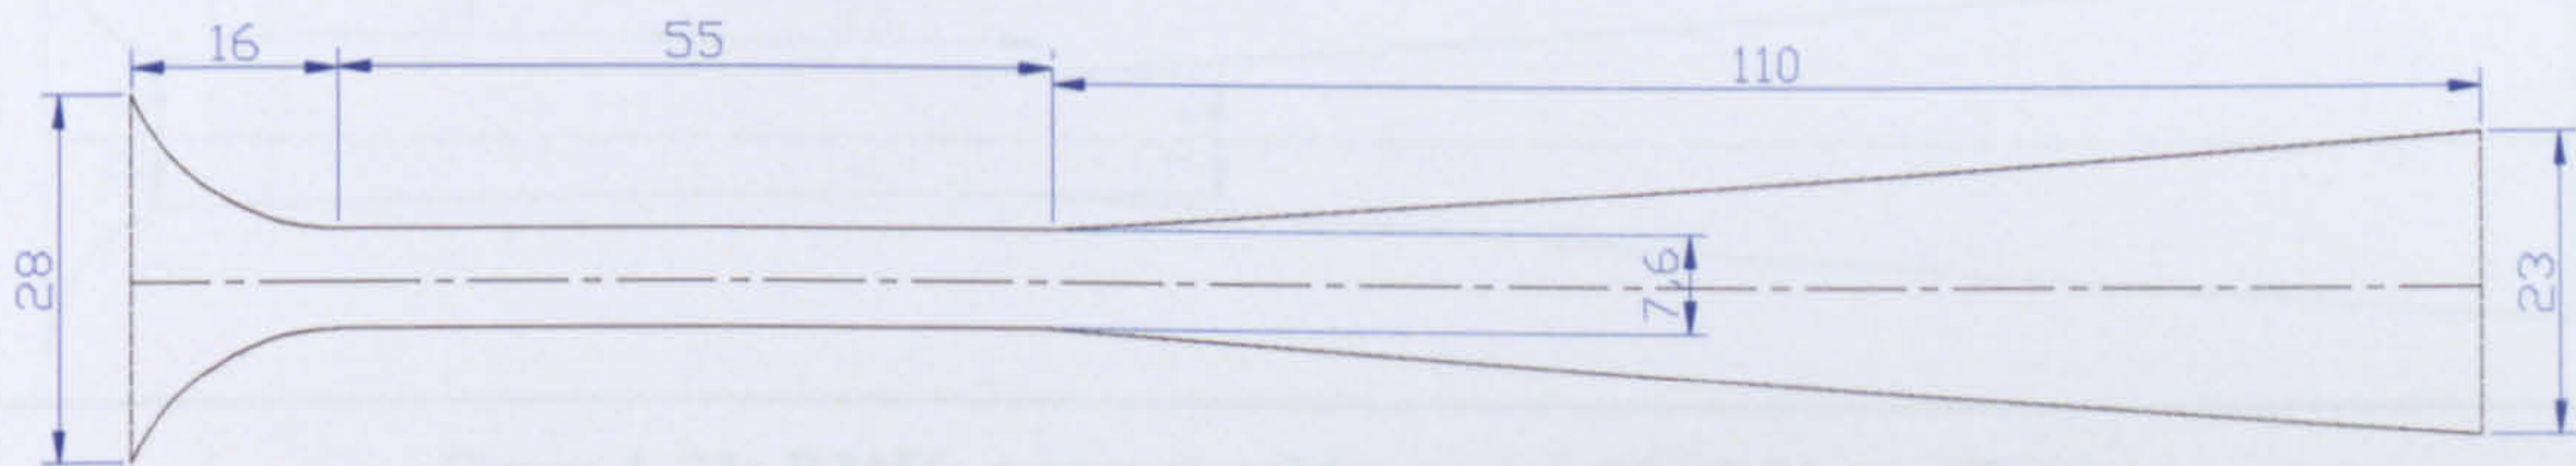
R245fa conventional diffuser dimensions (mm)
